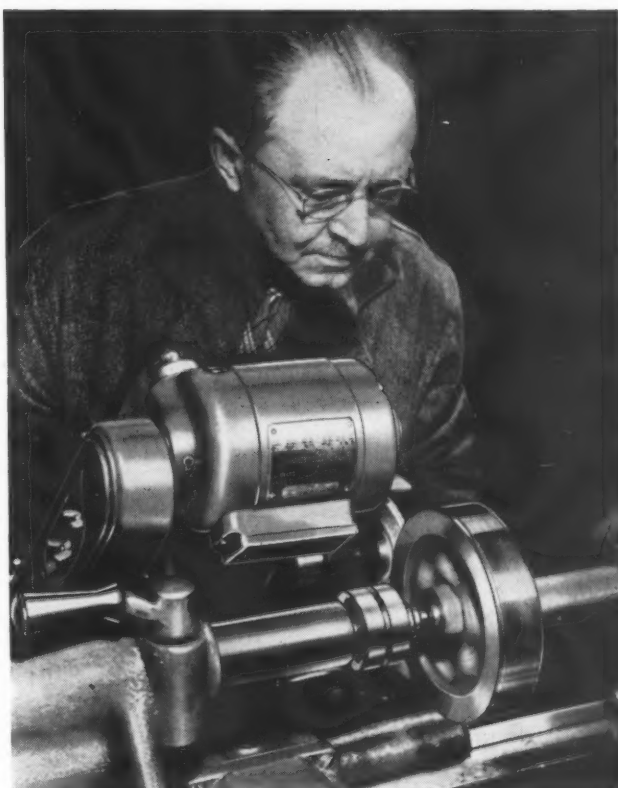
Toolpost grinders are frequently employed on lathes for thread grinding
